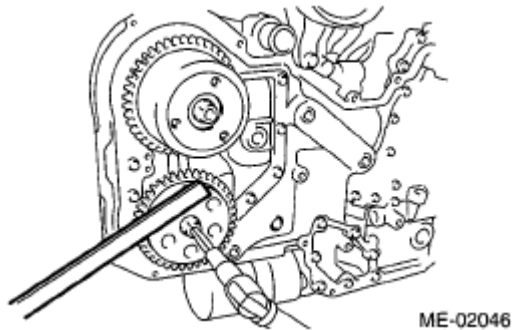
Identifying Cam Sprocket Wrench (ST 18231AA020)
